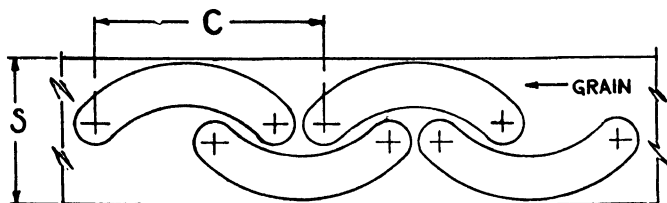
Arc-shaped blanks cut from a double row and using long blanking centers.
